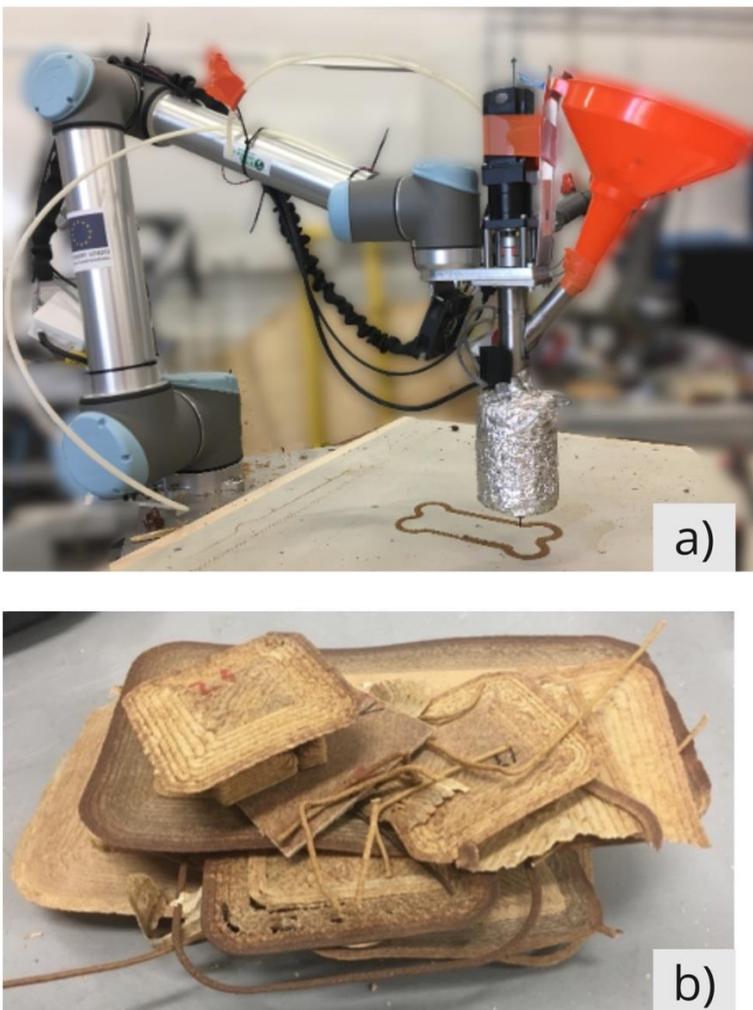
a) Fused Granular Fabrication 3D-printer and b) WPC waste made by FGF 3D-printer
